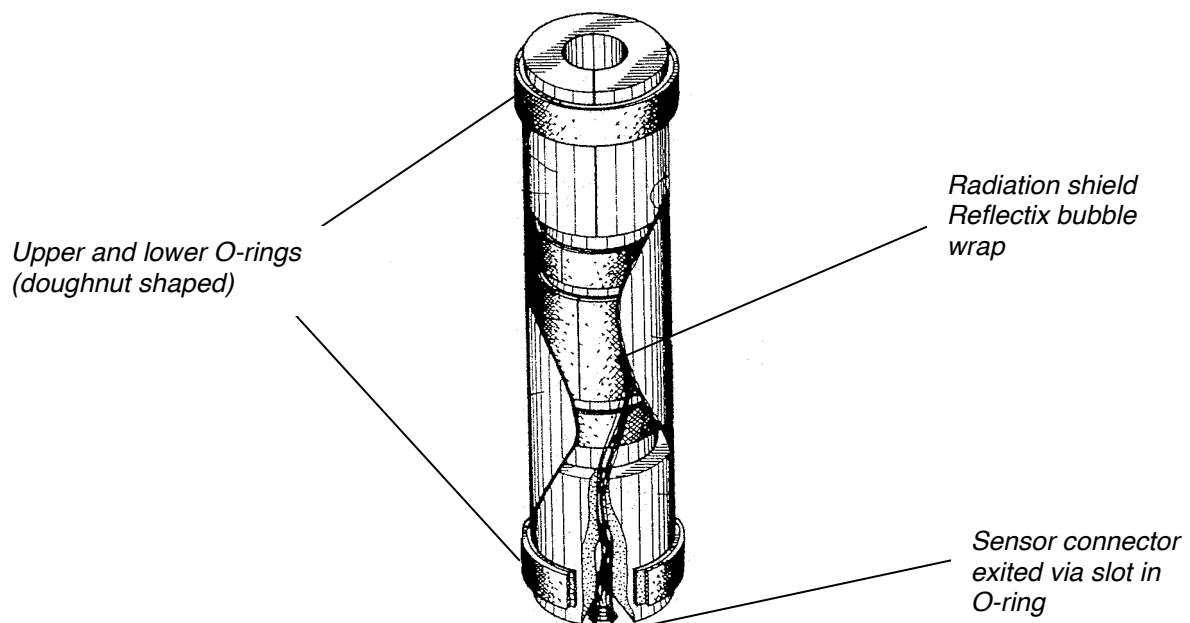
Sensor Mechanical Diagram – With weather shield assembly
